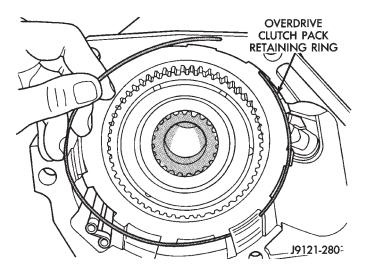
Removing/Installing Overdrive Clutch Pack Retaining Ring
